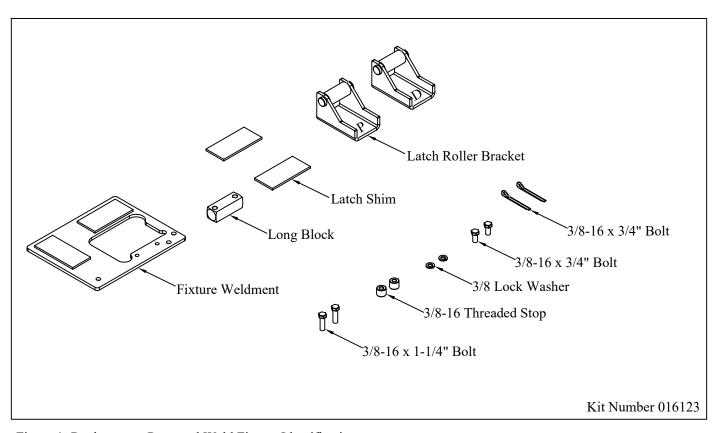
Replacement Parts and Weld Fixture Identification
